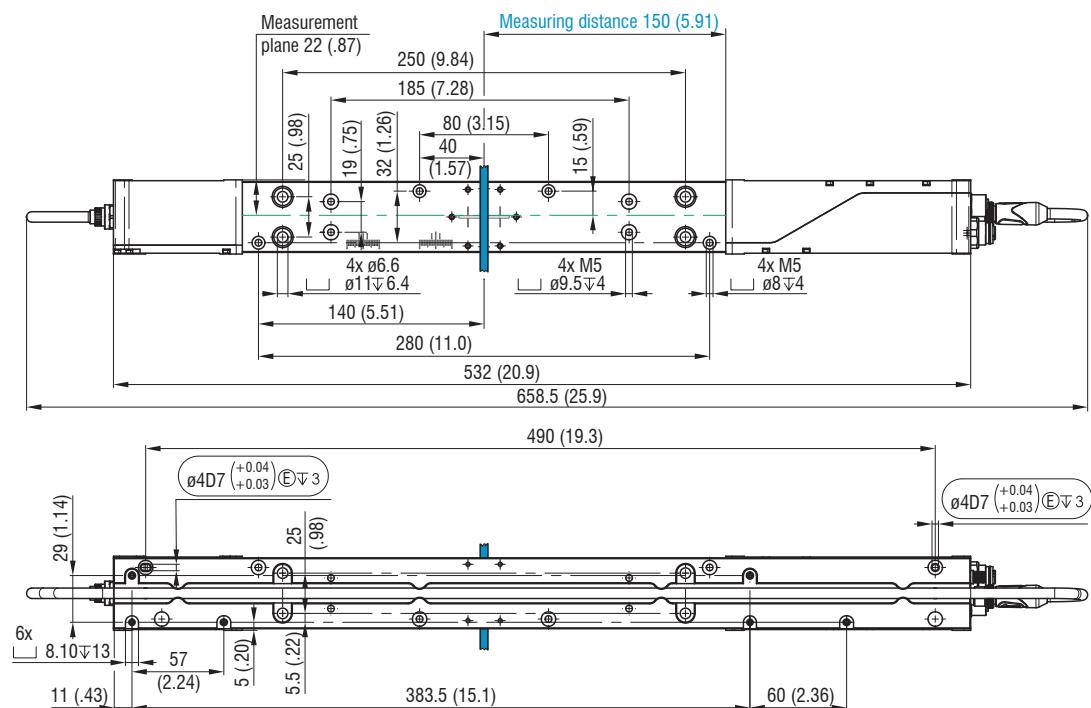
Dimensional drawing of light source and receiver ODC2700-10, ODC2700-40 with mounting rail, dimensions in mm
